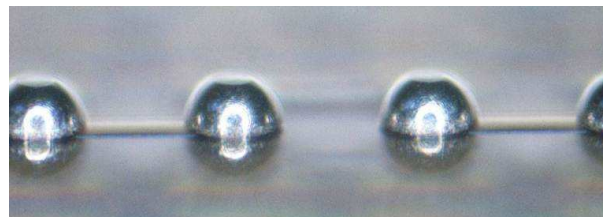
Optical microscope side view of $40\text{ }\mu\text{m}$ solder balls placed with the SB² Jet on a contact chain test structure.
